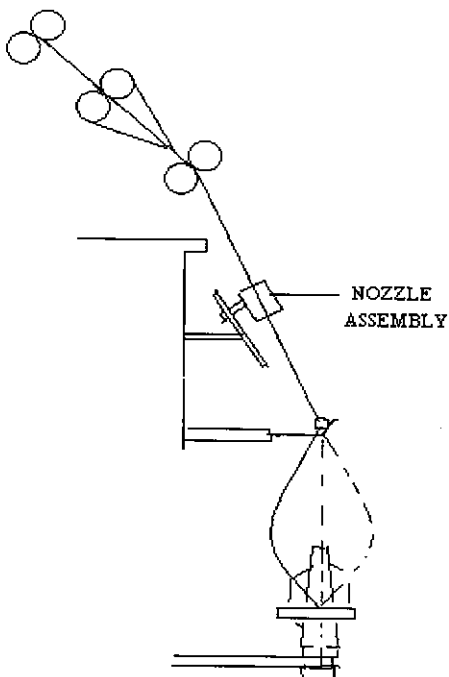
Arrangement of Air jet nozzle in Ring frame.
